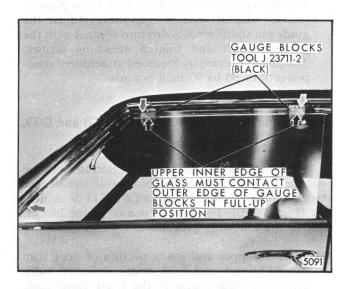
Door Window - In and Out and Up-Travel Alignment - "B, C and E" Styles
